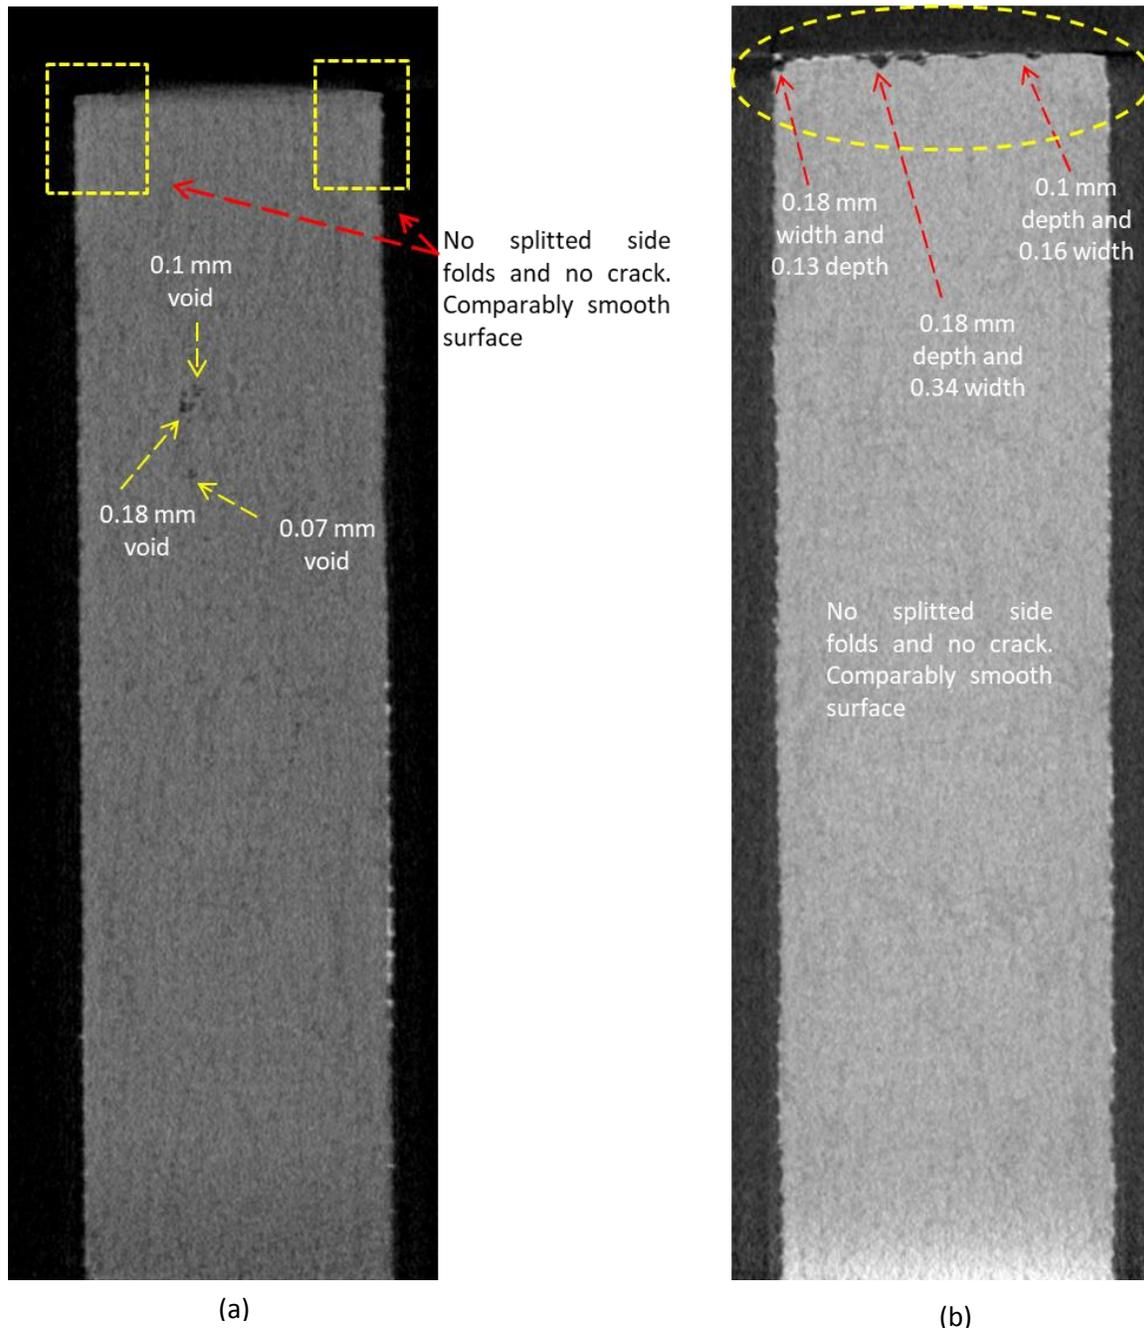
Machining induced defects at 250 μm cutting depth (a) at 45° and (b) at 0° fiber
